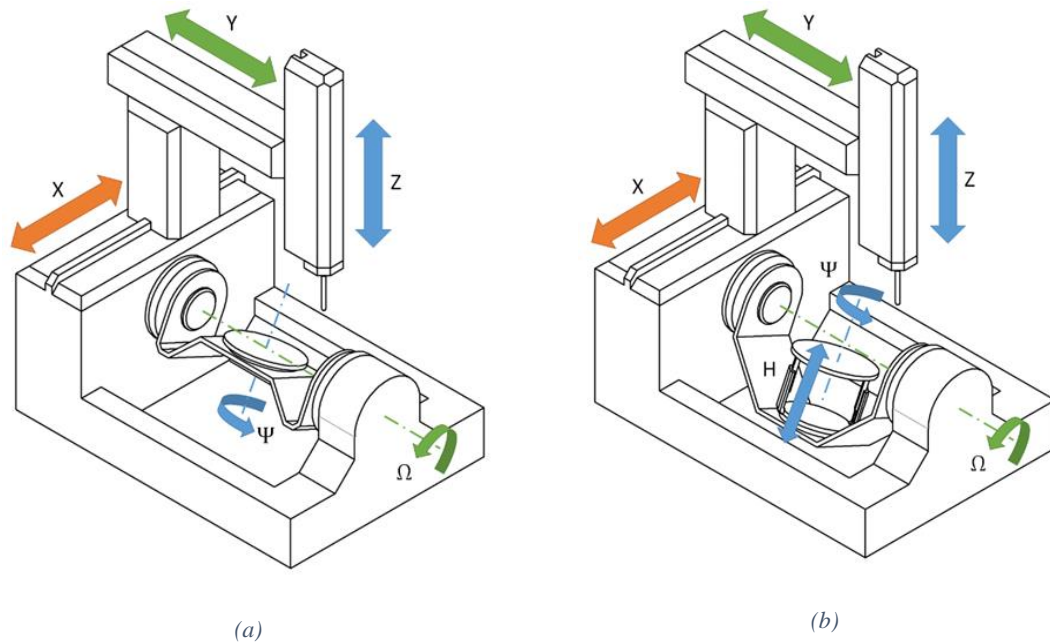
layout of the RRTTT machine tool (a), and layout of the TRRTTT machine tool (b)
